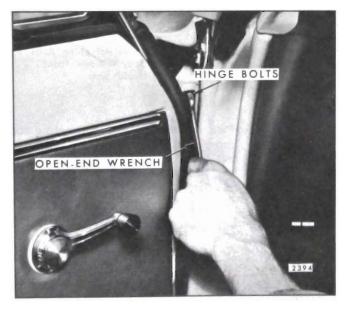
Front Door Hinge Attachment - ''F'' Styles
